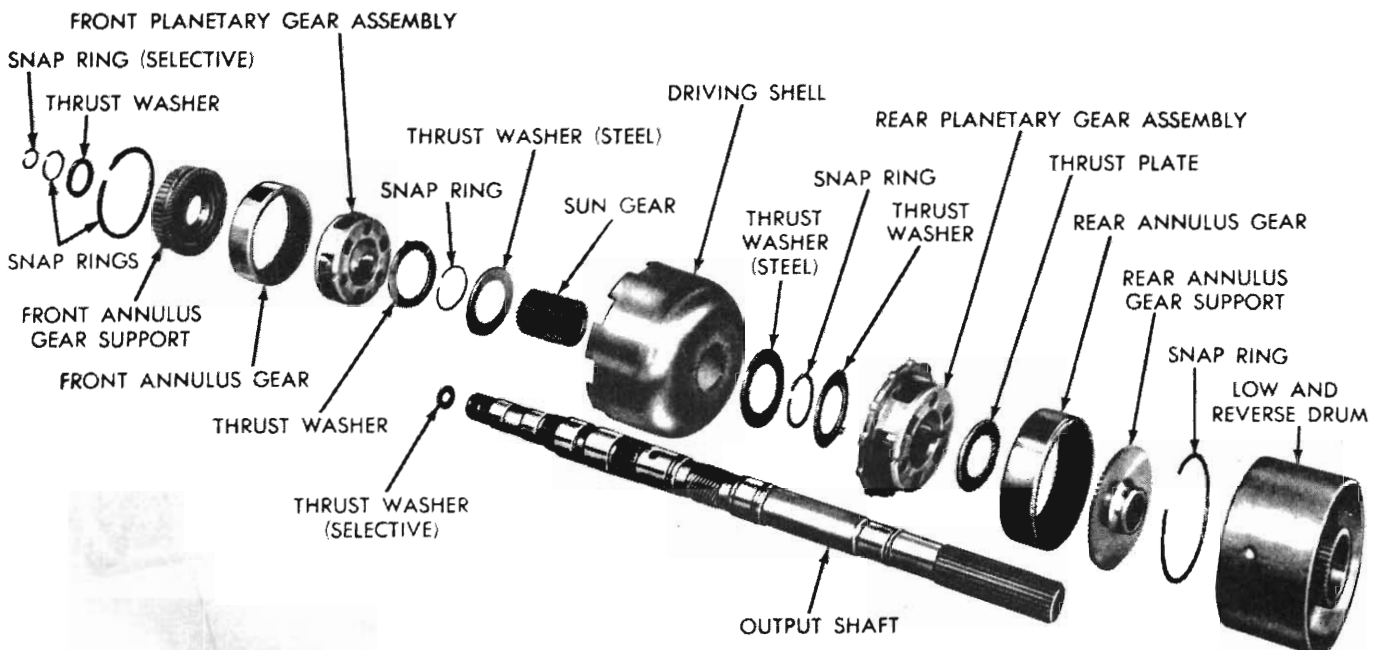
Planetary gear train and output shaft disassembled (A-904)
